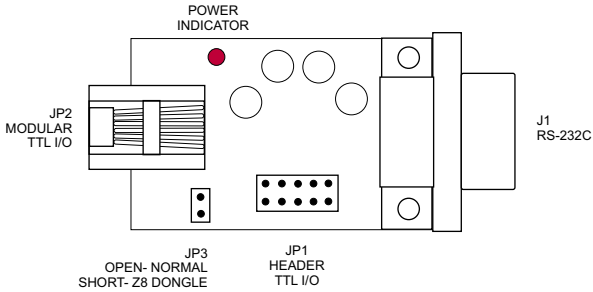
RS-232C to TTL Converter component layout showing the terminals and jumper connectors.
